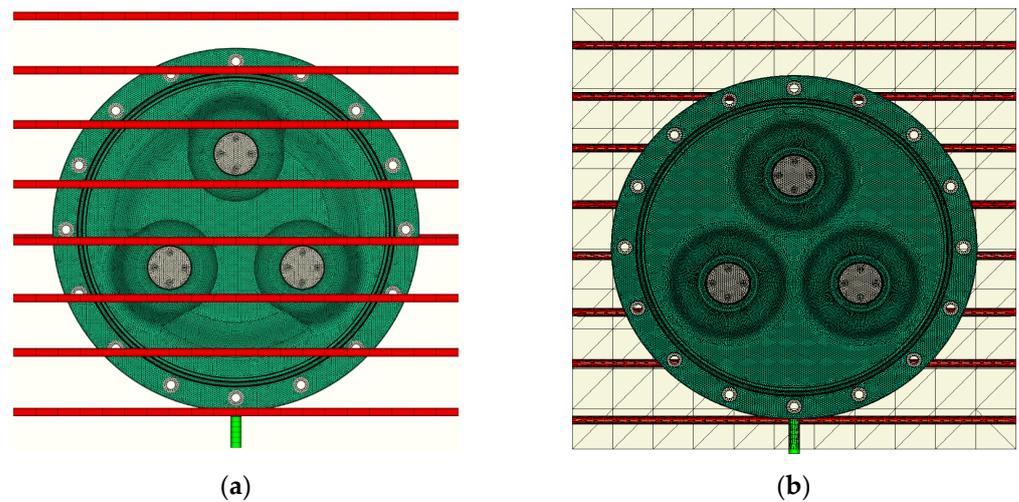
3D mesh image of the spacer (a); and cross-sectional view of the mold for spacer (b).
